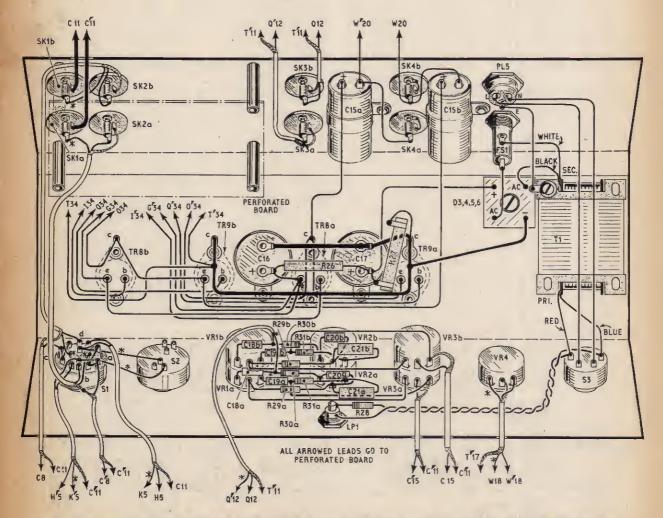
The wiring of the base and front panel piece (Section 1) and that of the rear panel (Section 2), and assembled into one unit. Asterisks are shown to identify twin leads. Arrowed code numbers relate to perforated board locations (see Fig. 5 last month). For exact position of board see photographs. Observe thick 12 s.w.g. wires
